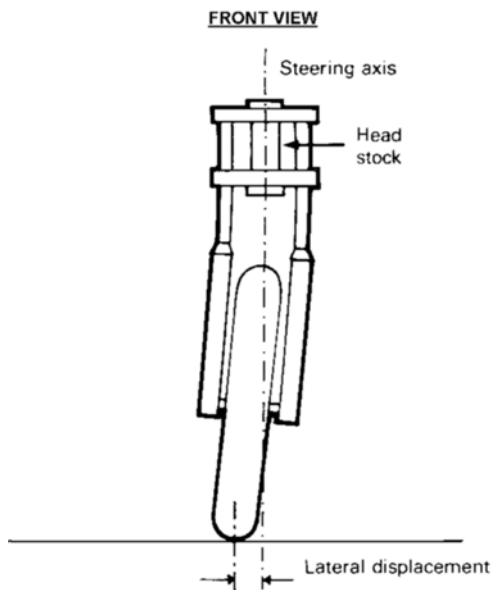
Lateral displacement due to fork and wheel flexure.
